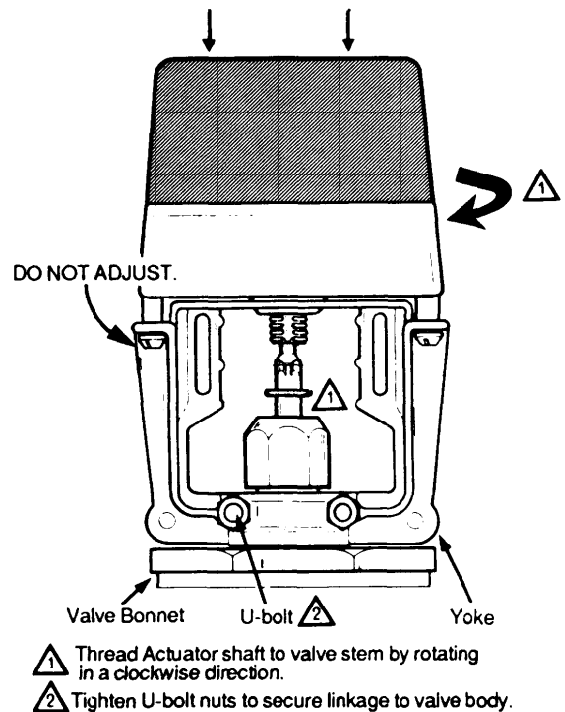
ASSEMBLY OF ML7984 TO VALVE.
